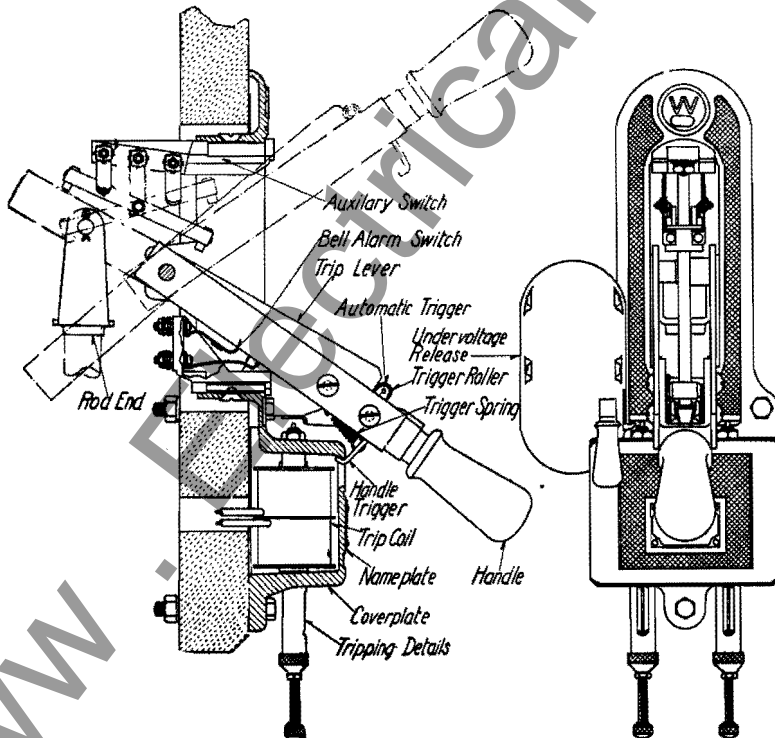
COVERPLATE 2-COIL SINGLE HANDLE
